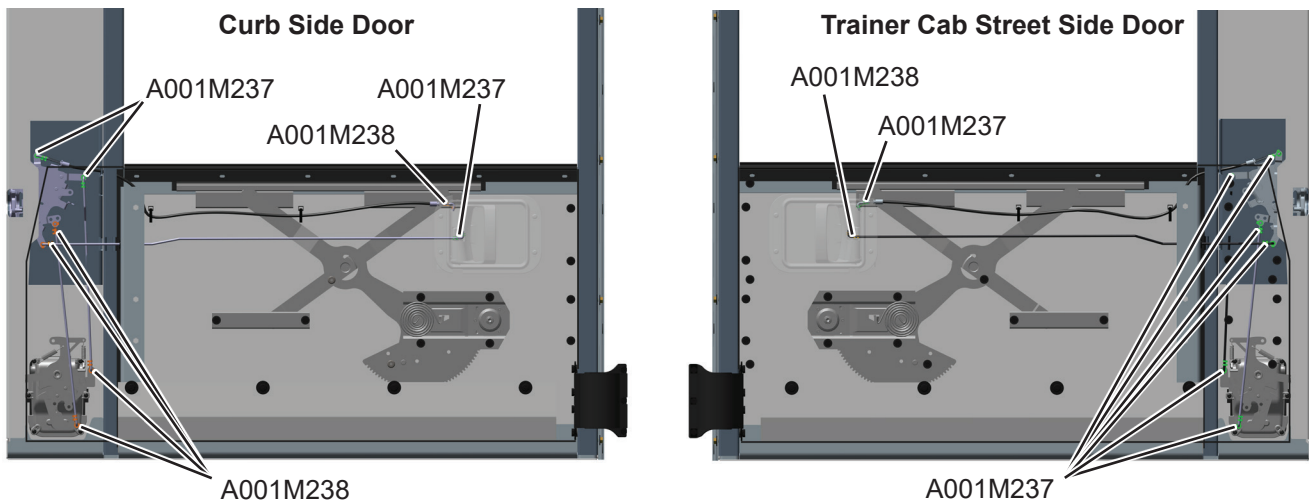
Cab Door Rod Clip Locations - Interior Door Skin Hidden for Clarity
